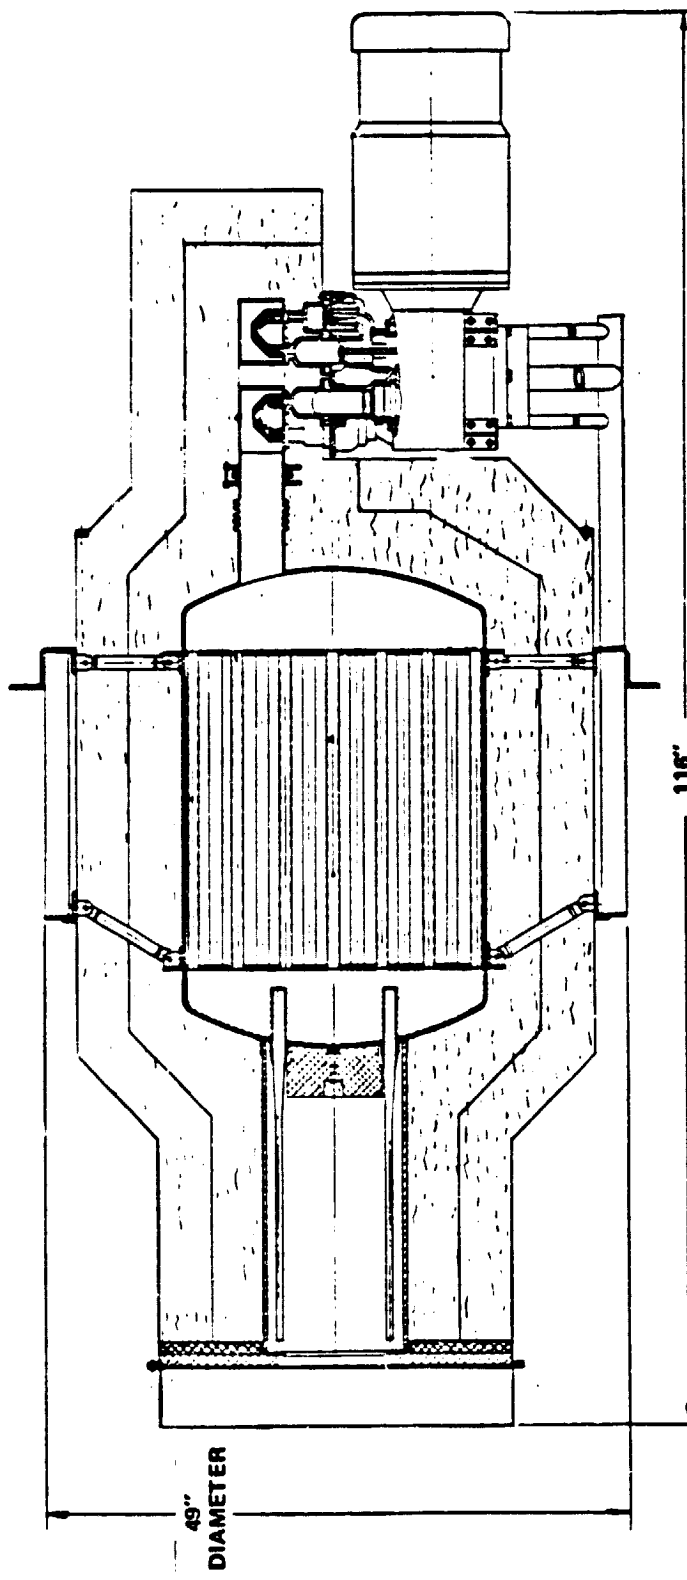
Heat Pipe Solar Receiver with Tube and Header TES.
